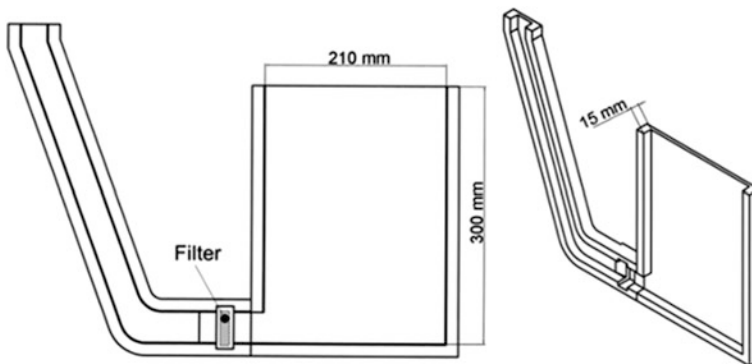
Schematic sketch of one half part of mild steel mould [16]
